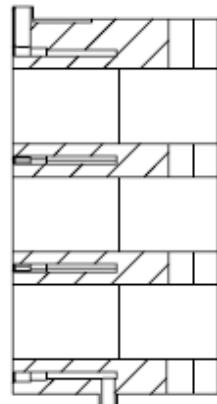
technical drawing of the block. Section view shows cooling canals from the side view.
